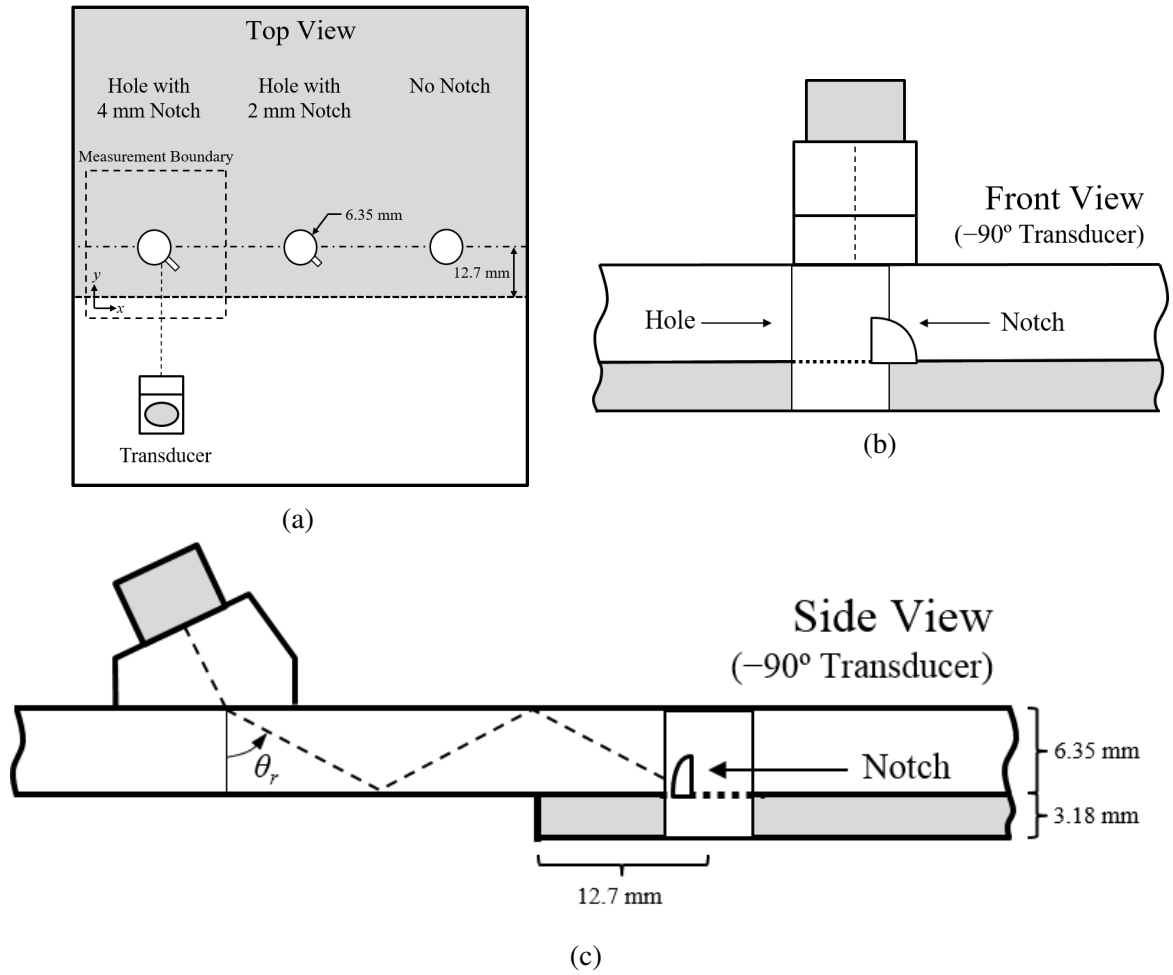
(a) Top view of bonded specimen #2 showing measurement area, (b) front view with non-skewed notch geometry, and (c) side view with beam path
